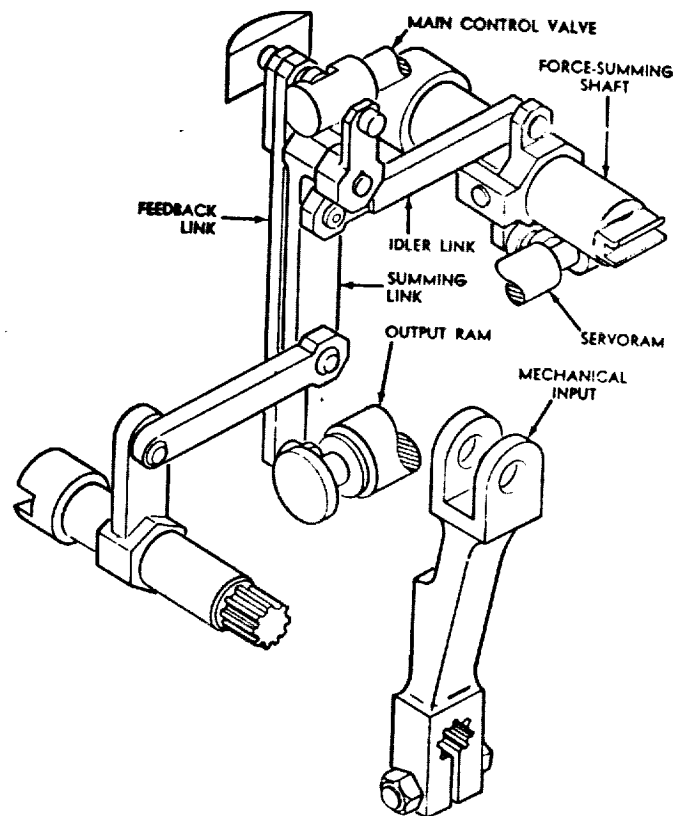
TRIPLE REDUNDANT ACTUATOR ASSEMBLY
